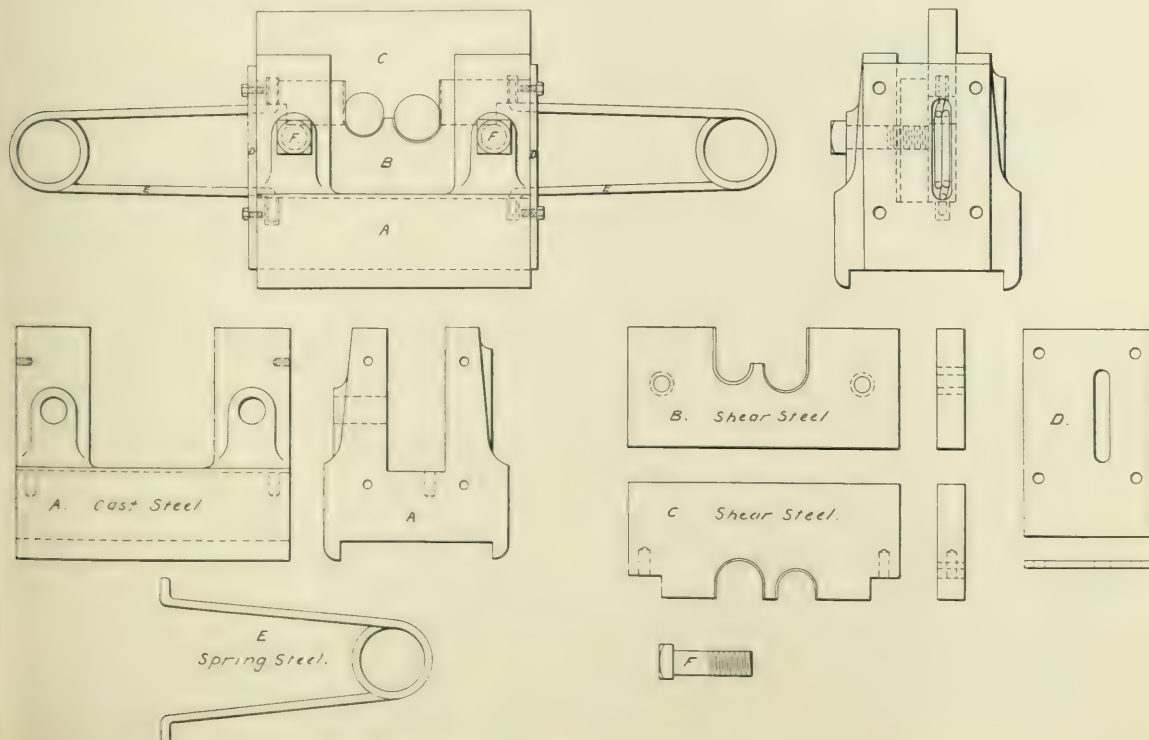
Device for Cutting Iron Under a Steam Hammer.
